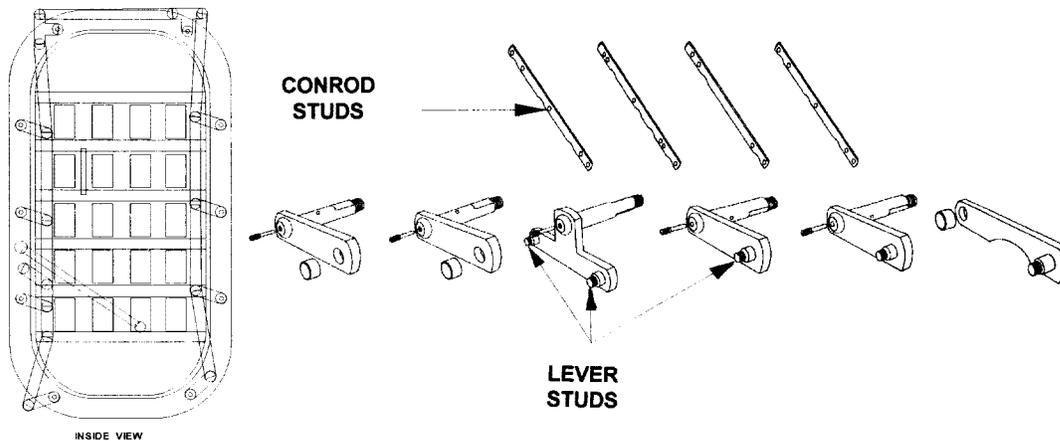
Quick-Acting Watertight Door Lever and Connecting Rod Studs
